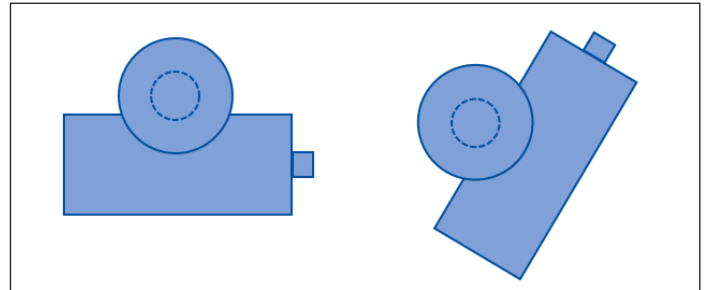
Single Gear Bleeding Procedure - Shaft Above Piston Cylinder
